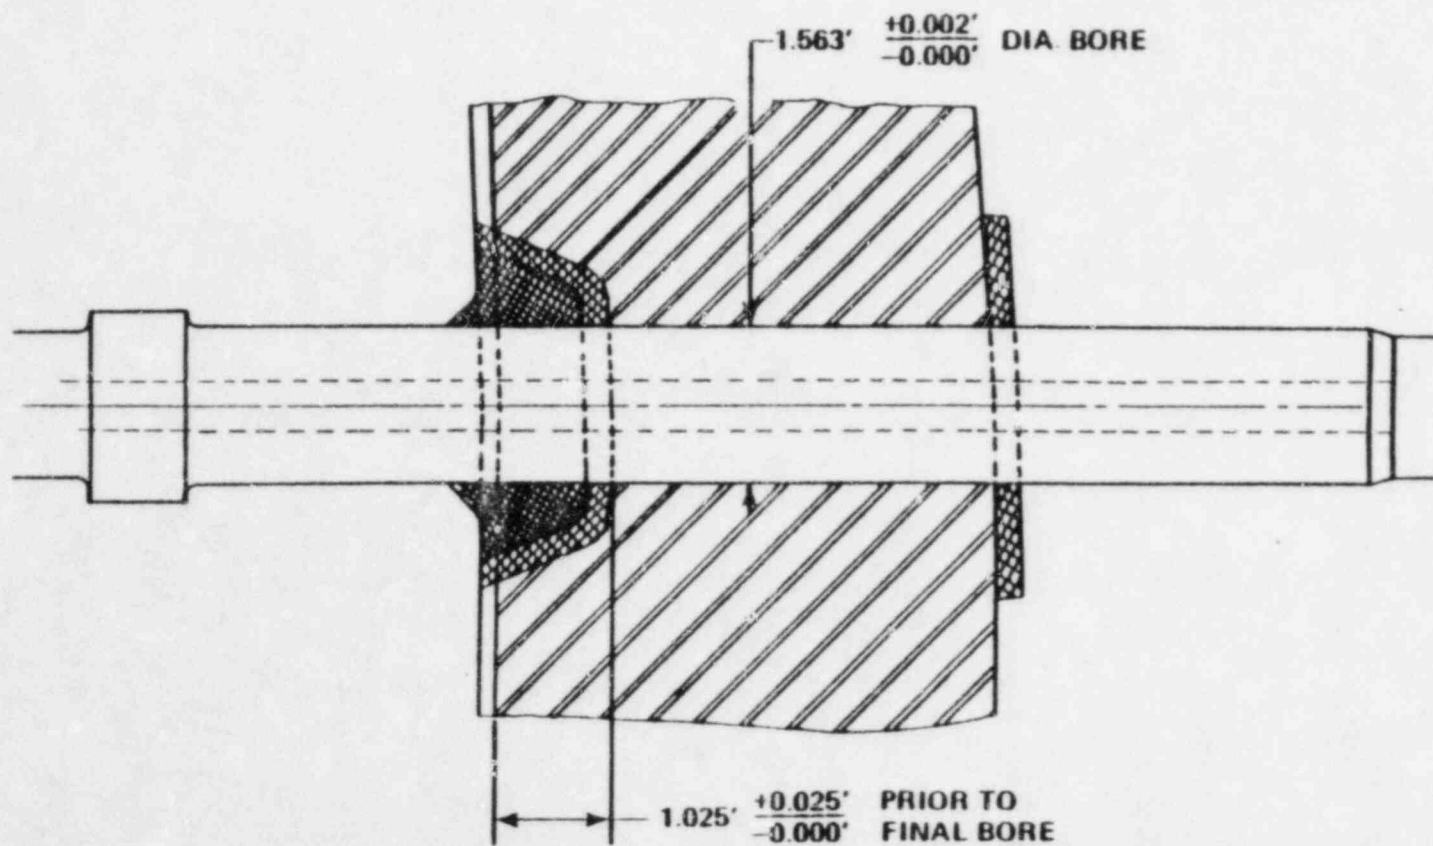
Typical instrumentation nozzle - vessel weld for a PWR system.
